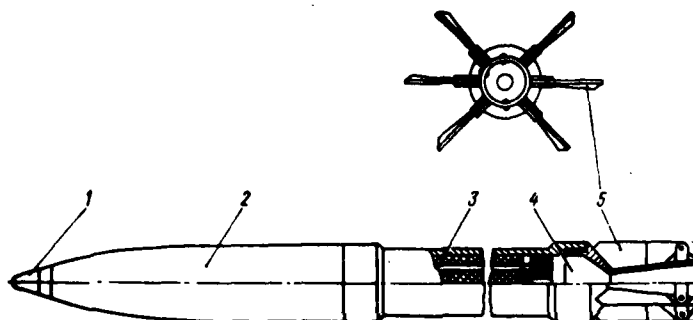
Aviation unguided rocket with exposed tail assembly: 1 - fuse; 2 - warhead; 3 - rocket camera/chamber with grains; 4 - nozzle exit; 5 - opened tail assembly.
